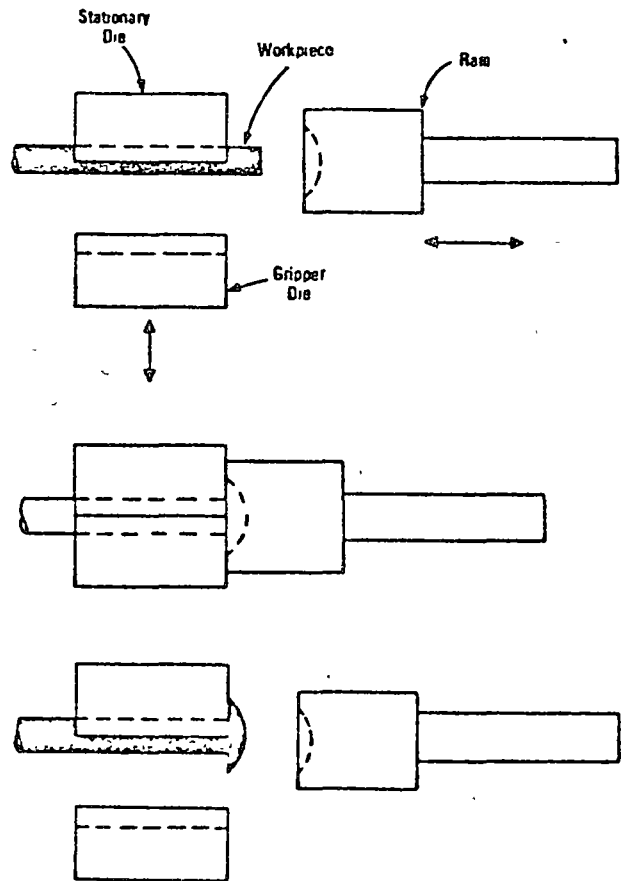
The forging machine (upsetter) is used to produce shapes on the end of the workpiece
